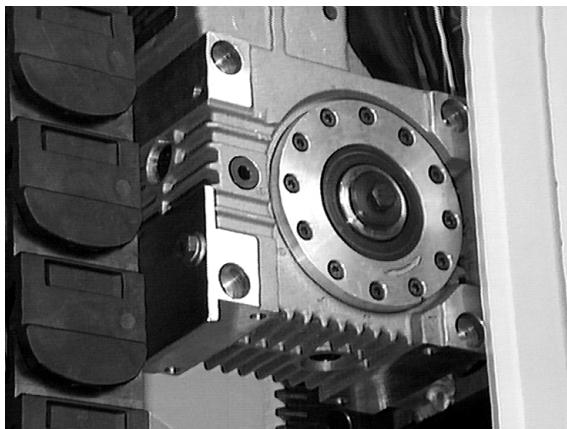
Gearing of the Lifting Column (Axis 6)
